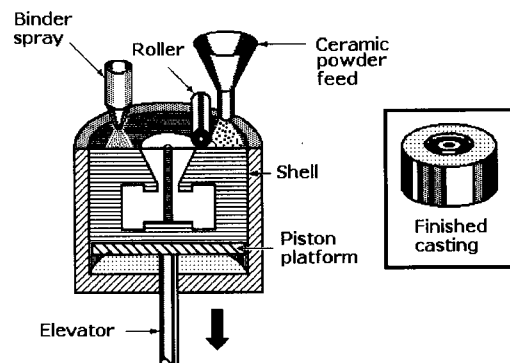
Direct Shell Production Casting (DSPC): Ceramic molds rather than 3D models are made by DSPC in a layering process similar to other RP methods. Ceramic powder is spread by roller over the surface of a movable piston that is recessed to the depth of a single layer. Then a binder is sprayed on the ceramic powder under computer control. The next layer is bonded to the first by the binder. When all of the layers are complete, the bonded ceramic shell is removed and fired to form a durable mold suitable for use in metal casting. The mold can be used to cast a prototype. The DSPC process is considered to be an RP method because it can make molds faster and cheaper than conventional methods.
